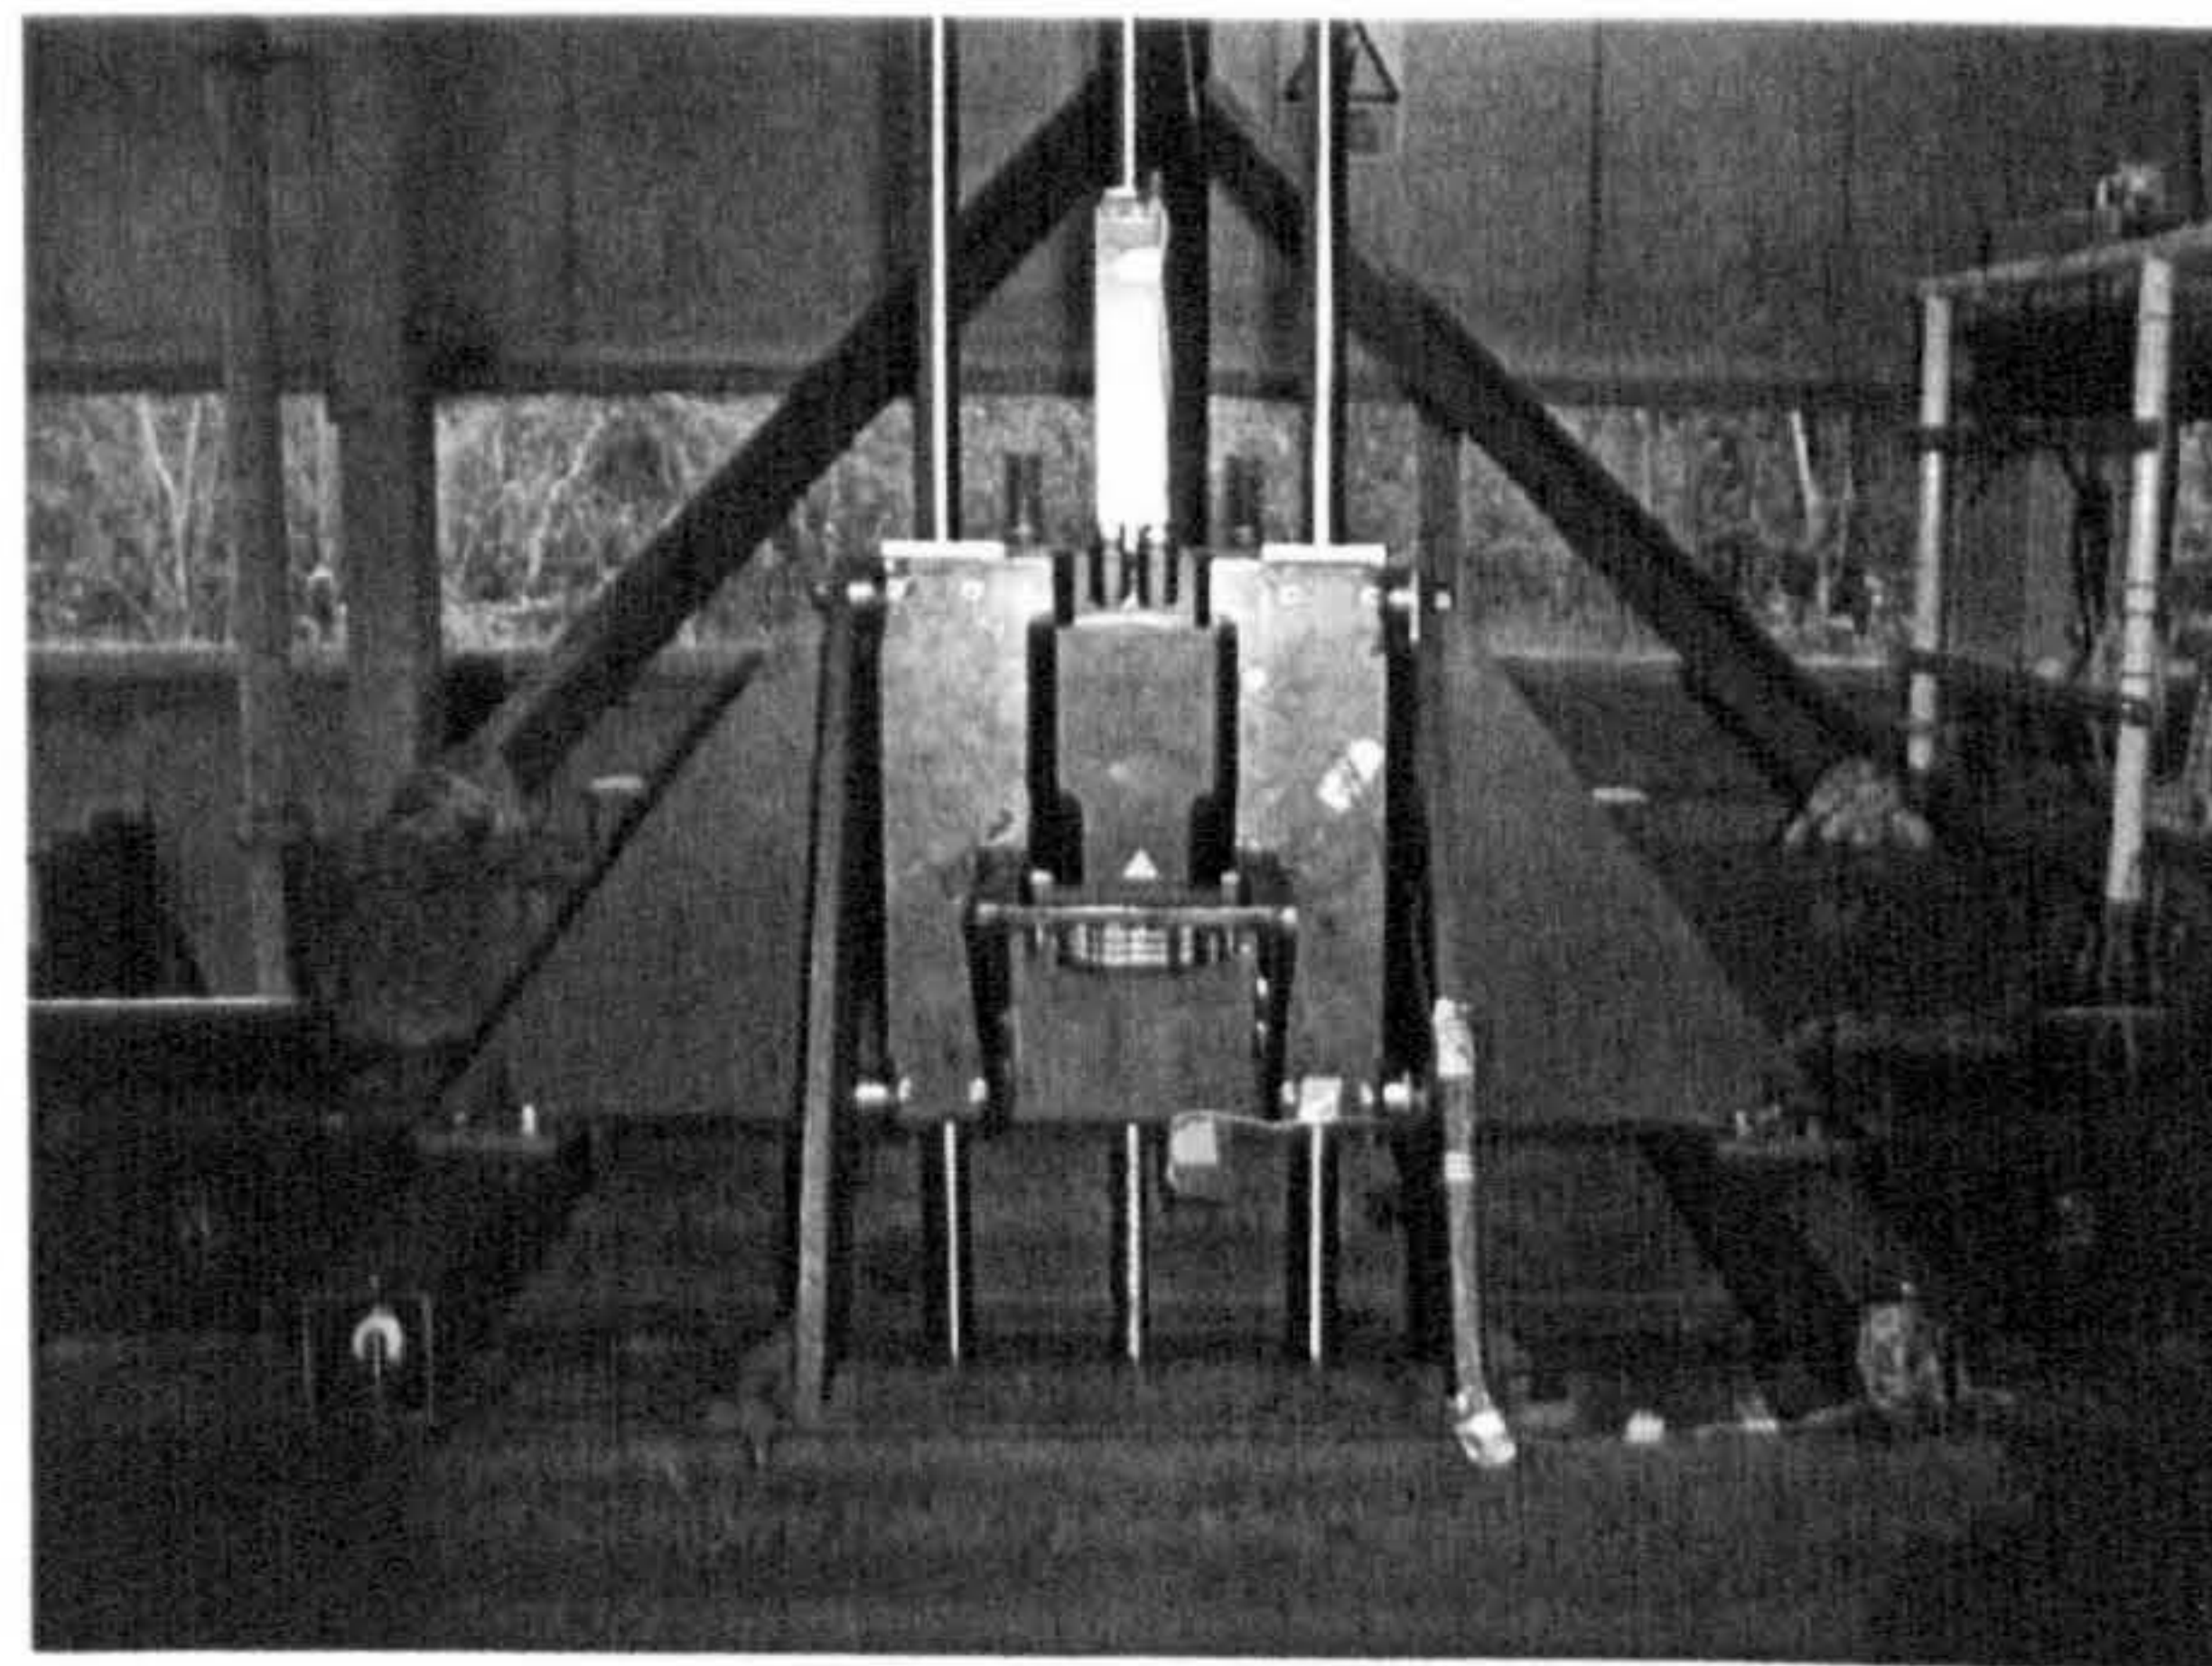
Ball nut bearing flange screwed into the drive frame and pulley bolted to ball nut.
